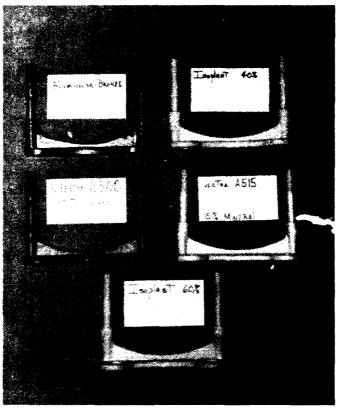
View of Al-Br bracket and unmodified injection-molded brackets
